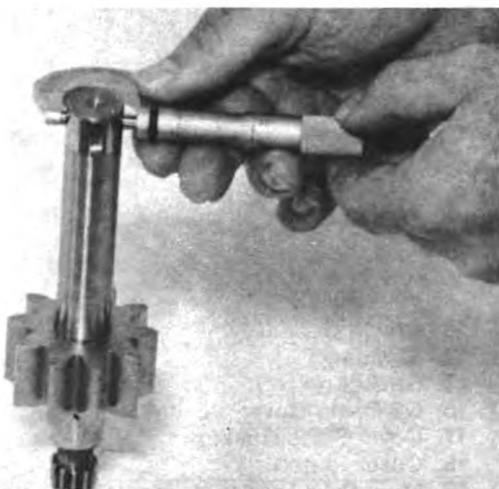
Measure The Outside Diameter Of The Drive Shaft.
